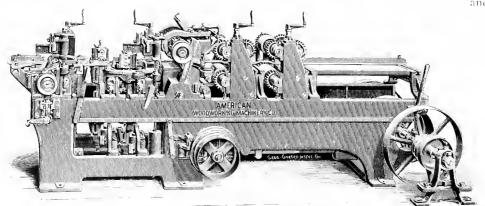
, American Inside Molder. American Wood Working Machinery Co.
